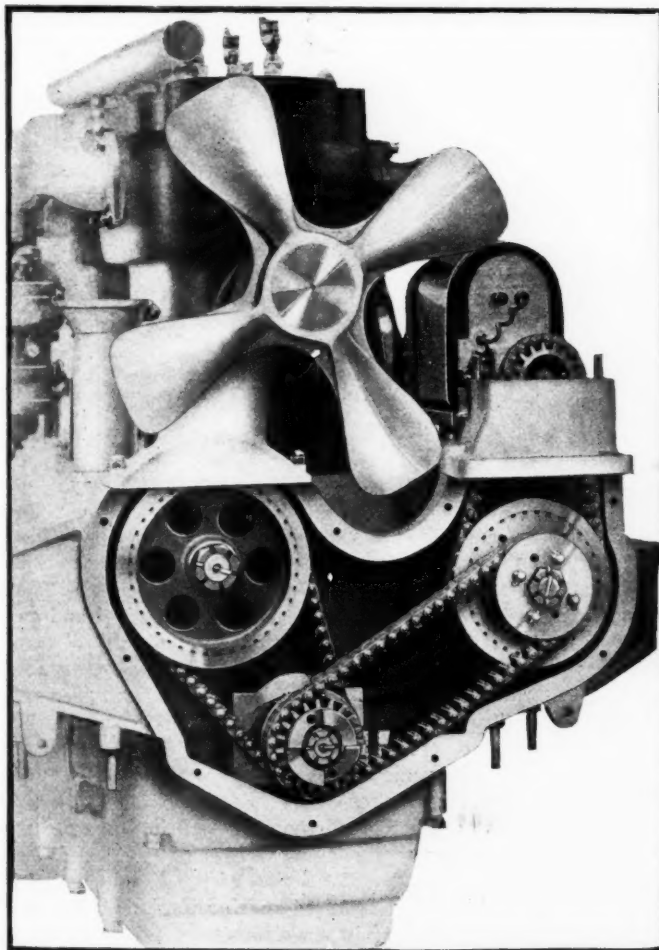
Front view of Stearns-Knight motor with front plate of timing gear case removed, showing silent chain drive
